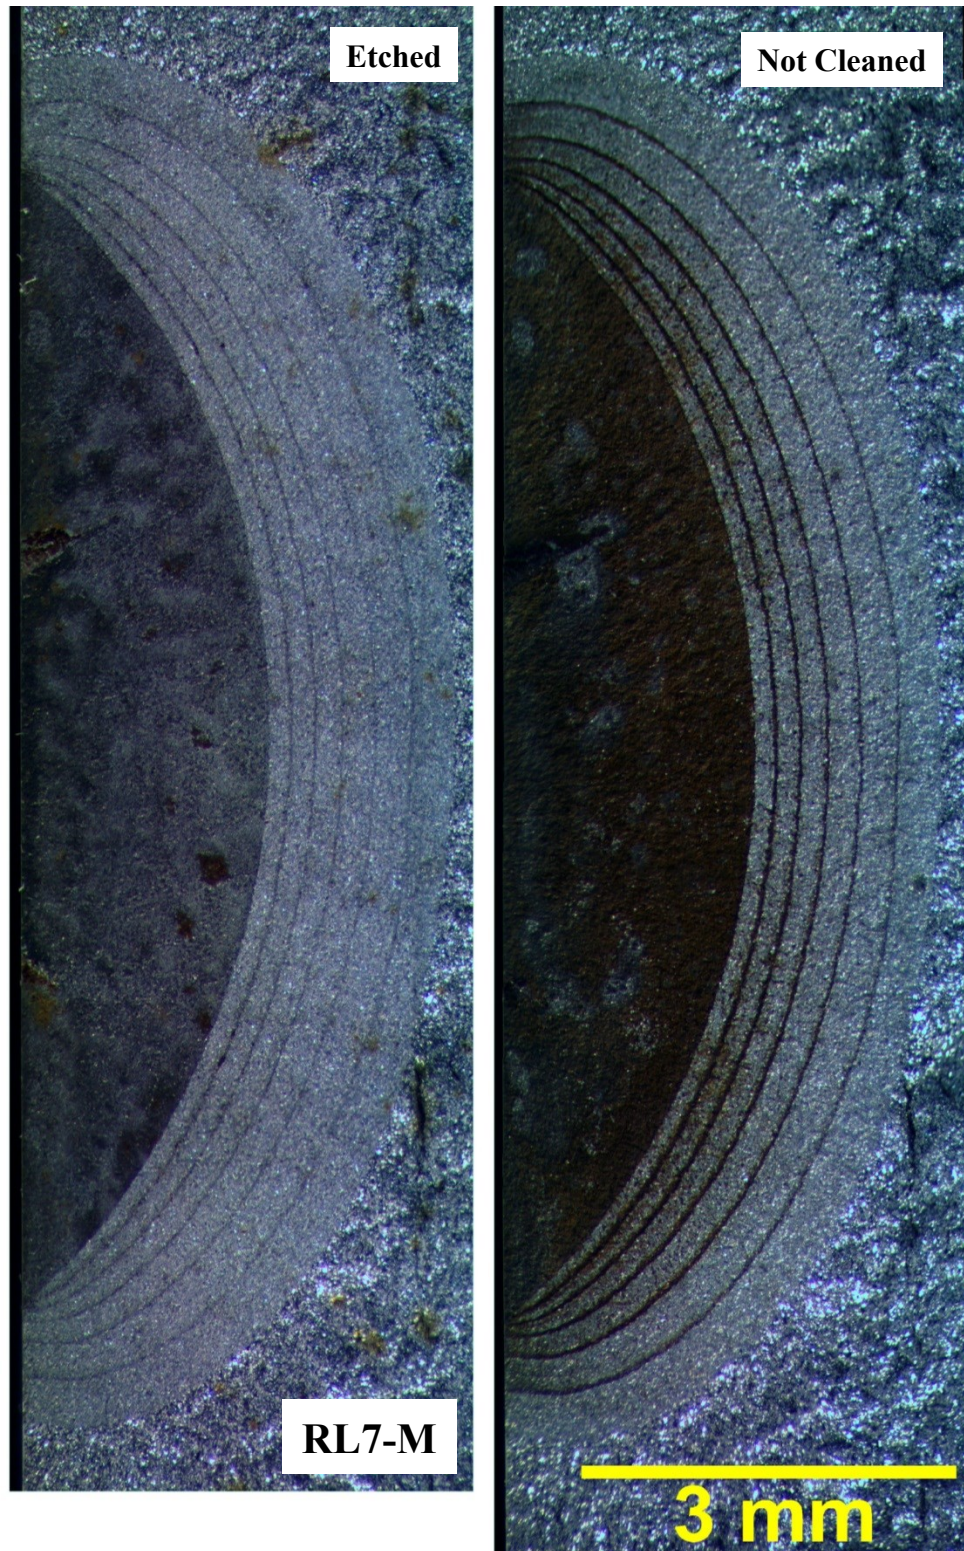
Fractograph for RL7-M. Imaged with a stereomicroscope. On the left is an etched fracture surface. On the right is a fracture surface that has not undergone cleaning.
